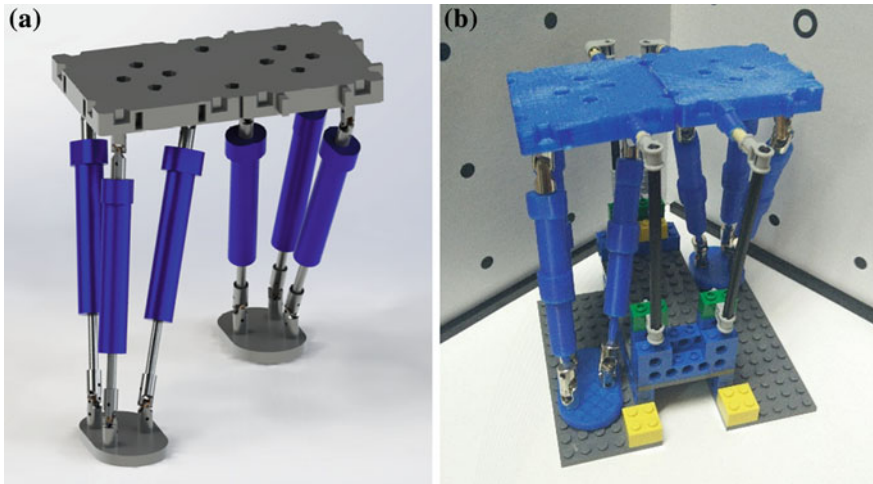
The LARM tripod locomotor: a a 3D model in SolidWorks® environment; b 3D printed model
